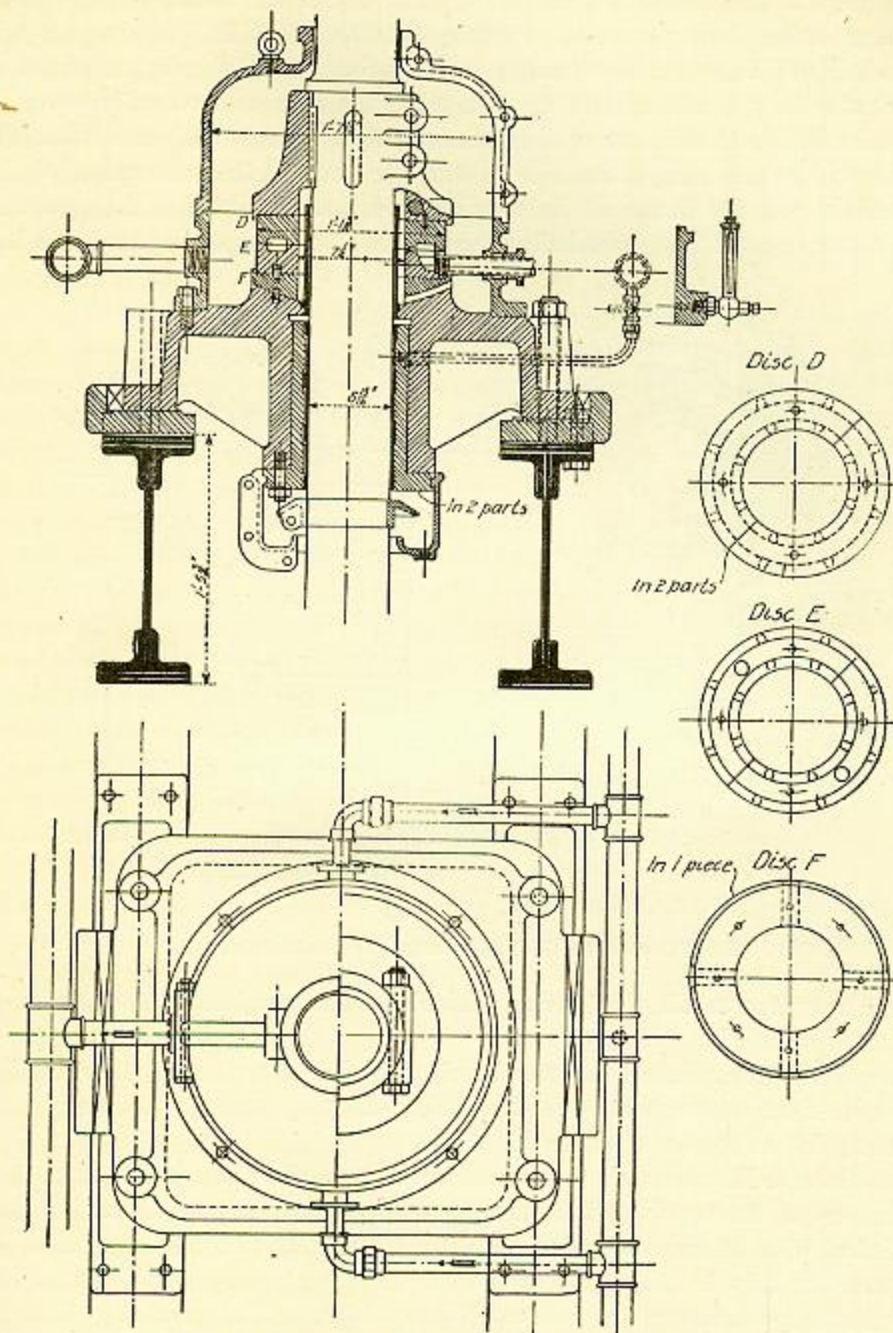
Oil Pressure Step-bearing for Vertical Shaft.
